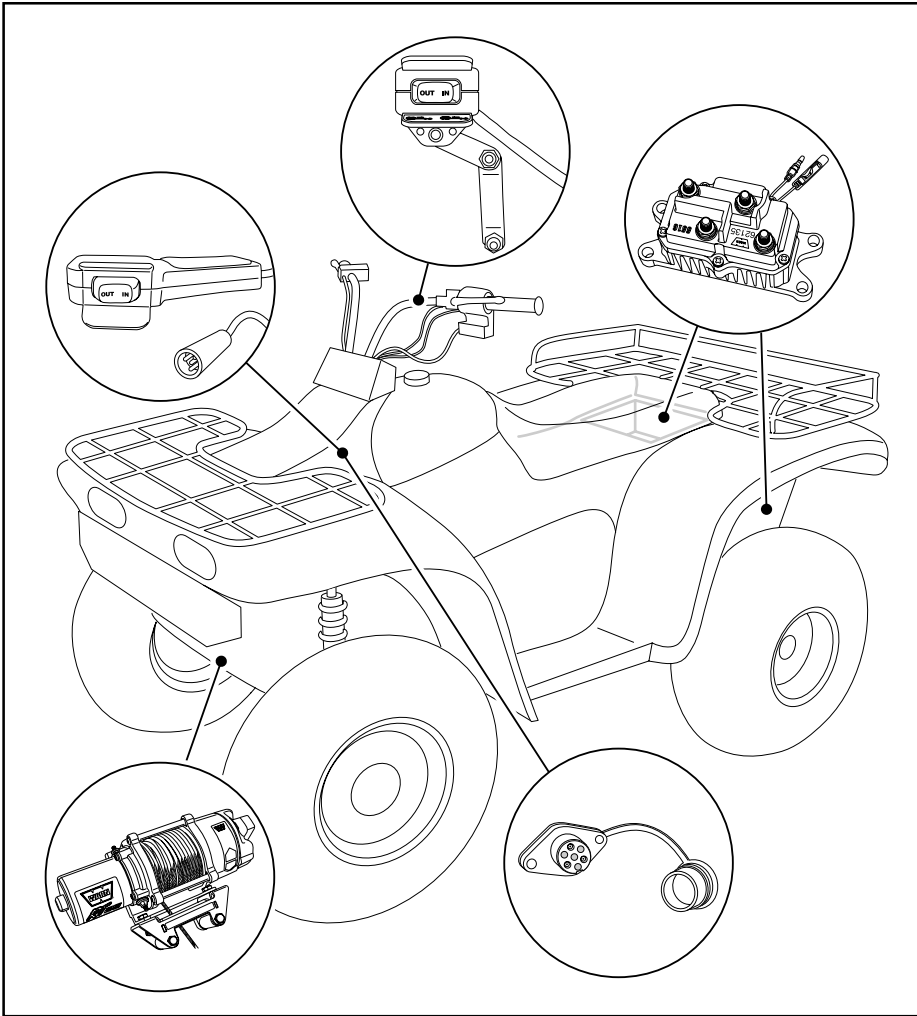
To install the complete kit, you will need to mount the winch, contactor handlebar mounted Mini-rocker switch and remote socket (optional on some models). Mounting locations may vary depending on make and model of the ATV. Read and understand the following instructions to choose the appropriate mounting locations.
